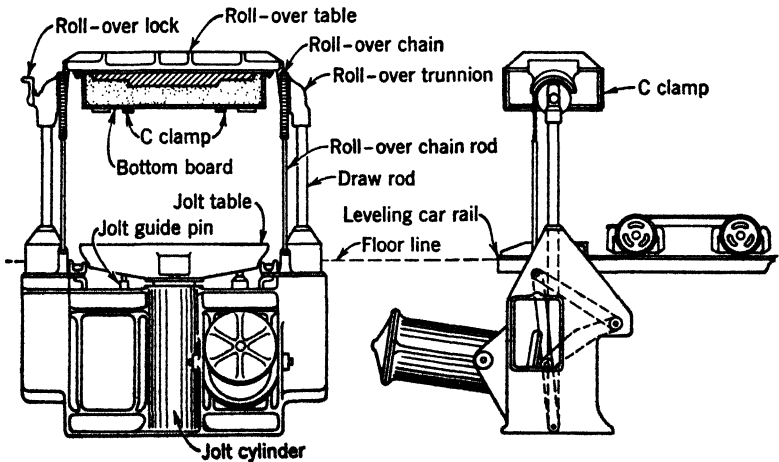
B. Mold has been rolled over and locked in position. The next step is to push leveling car in position, lower mold to car, remove clamps, and draw the pattern. (Reproduced from print belonging to Osborn Manufacturing Co., Cleveland, Ohio.)
